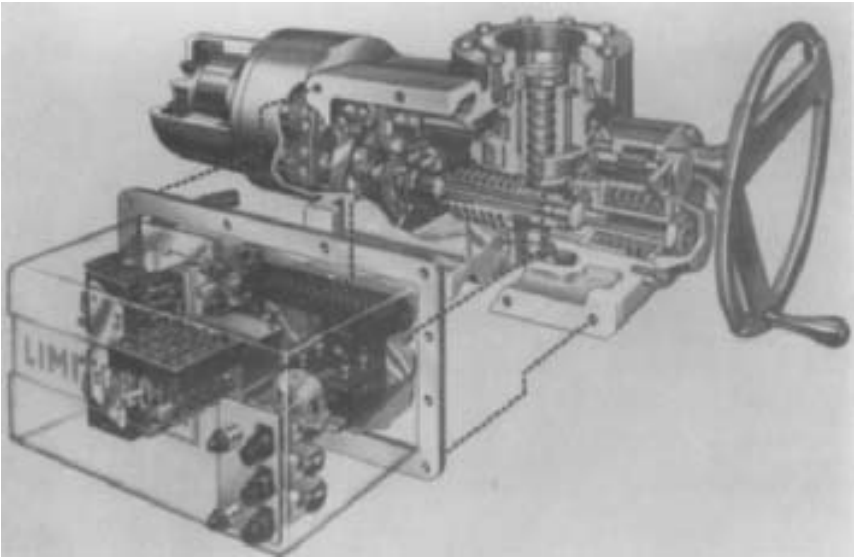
Electric-motor-driven actuator with mechanism for limiting torque (Philadelphia Gear)
